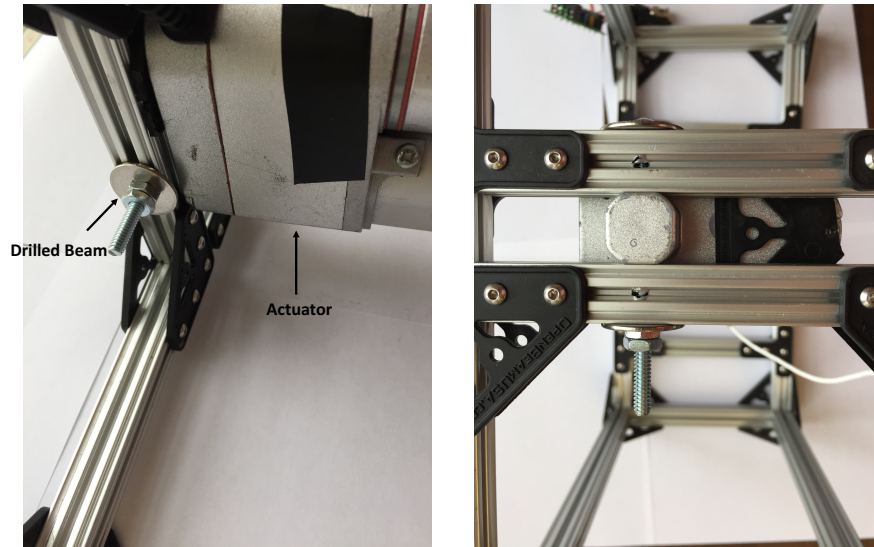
Fixing actuator onto frame; Left: Side view; Right: Top view
